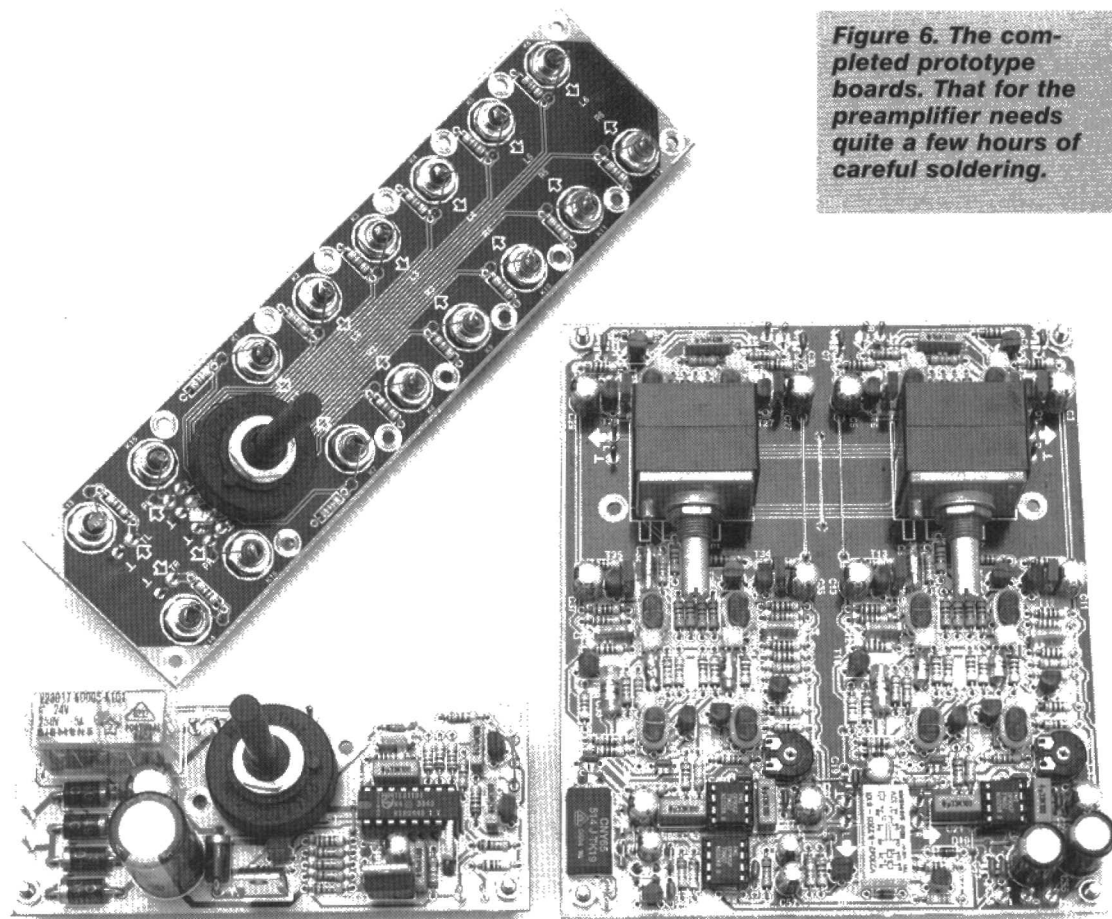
The completed prototype boards. That for the preamplifier needs quite a few hours of careful soldering.
